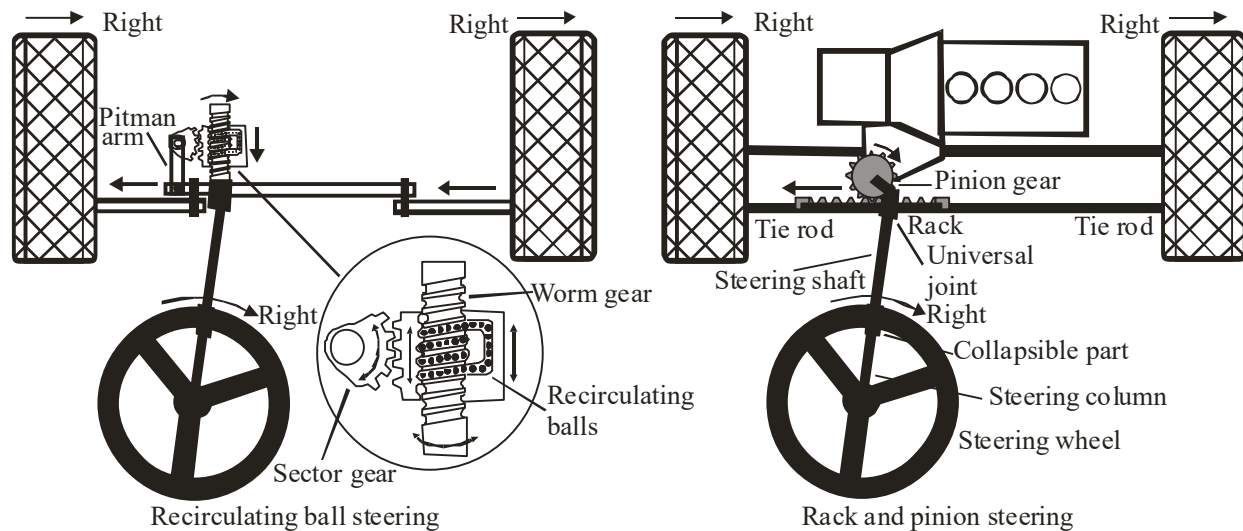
Recirculating ball steering (the steering gearbox) system (left) and Rack and pinion steering system (right).
